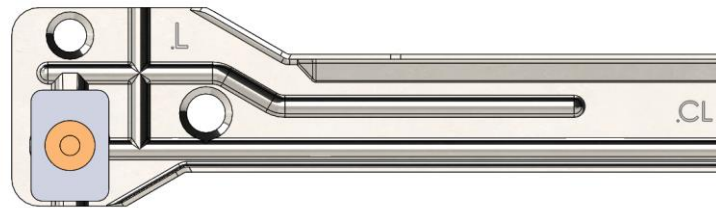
Modified cabinet slides with blocks instead of wheels.
